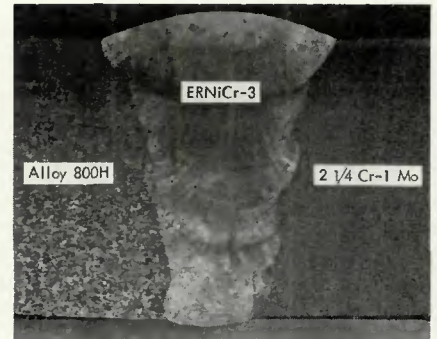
Alloy 800H to 2¼ Cr-1 Mo steel transition joint weld made with automatic gas tungsten arc process using "cold wire" filler metal additions of ERNiCr-3
